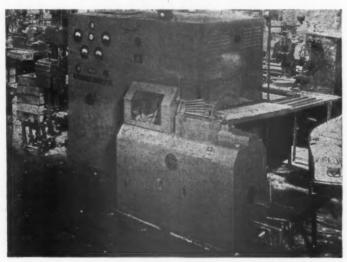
Automatic unit for surface-hardening steel shafts. Output: 300 shafts per hour. Power supply: 20 kW 400 kc/s valve generator.
